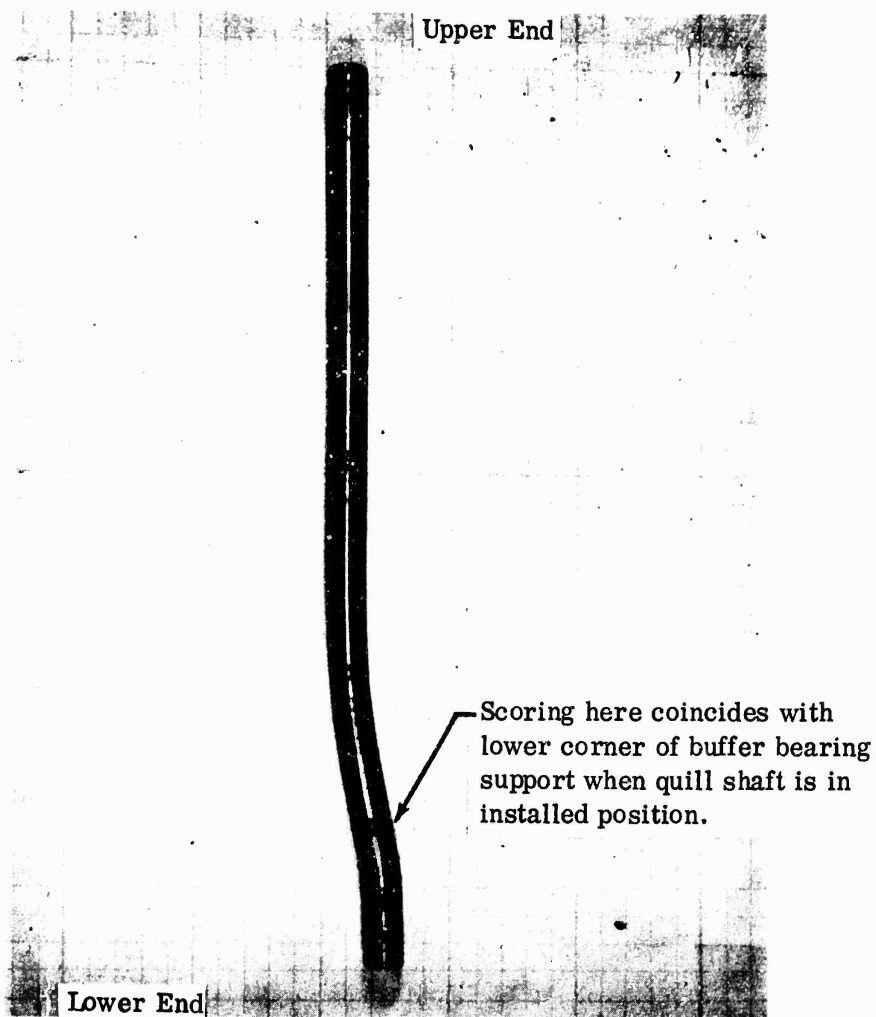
Spin-Pit Drive Quill Shaft After Attempted Proof Spin of Impeller MF-2.
